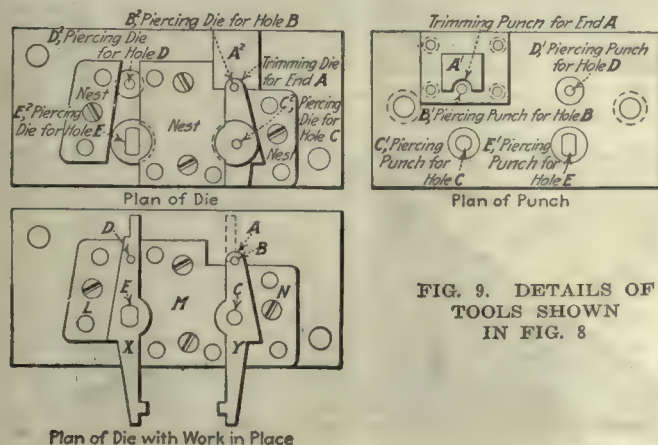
DETAILS OF TOOLS SHOWN IN FIG. 8
